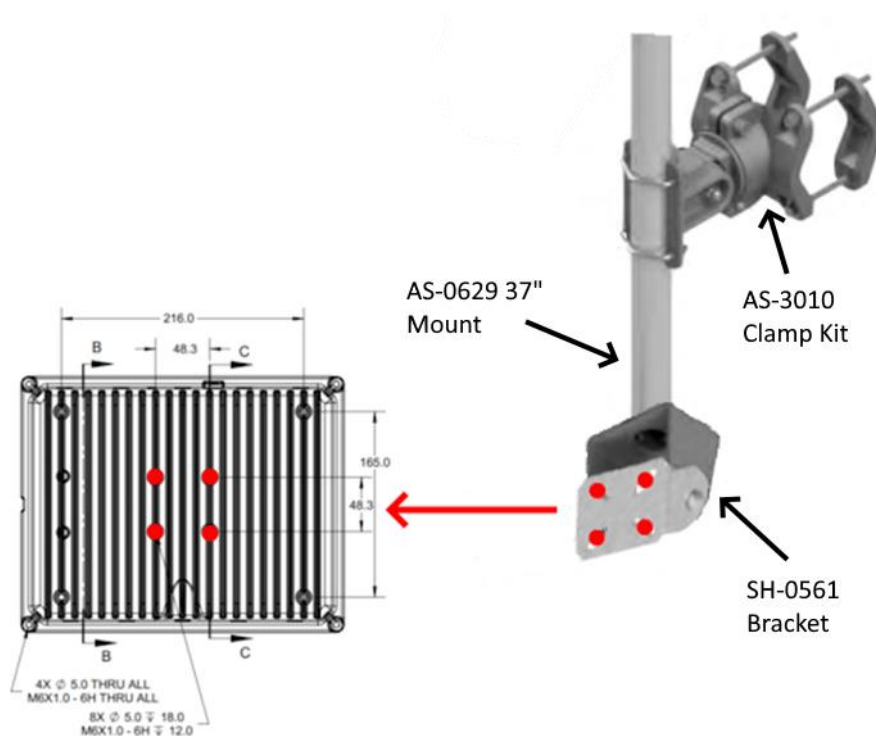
Pelco Clamp Kit and Mounting Bracket RSU Attachment Illustration
